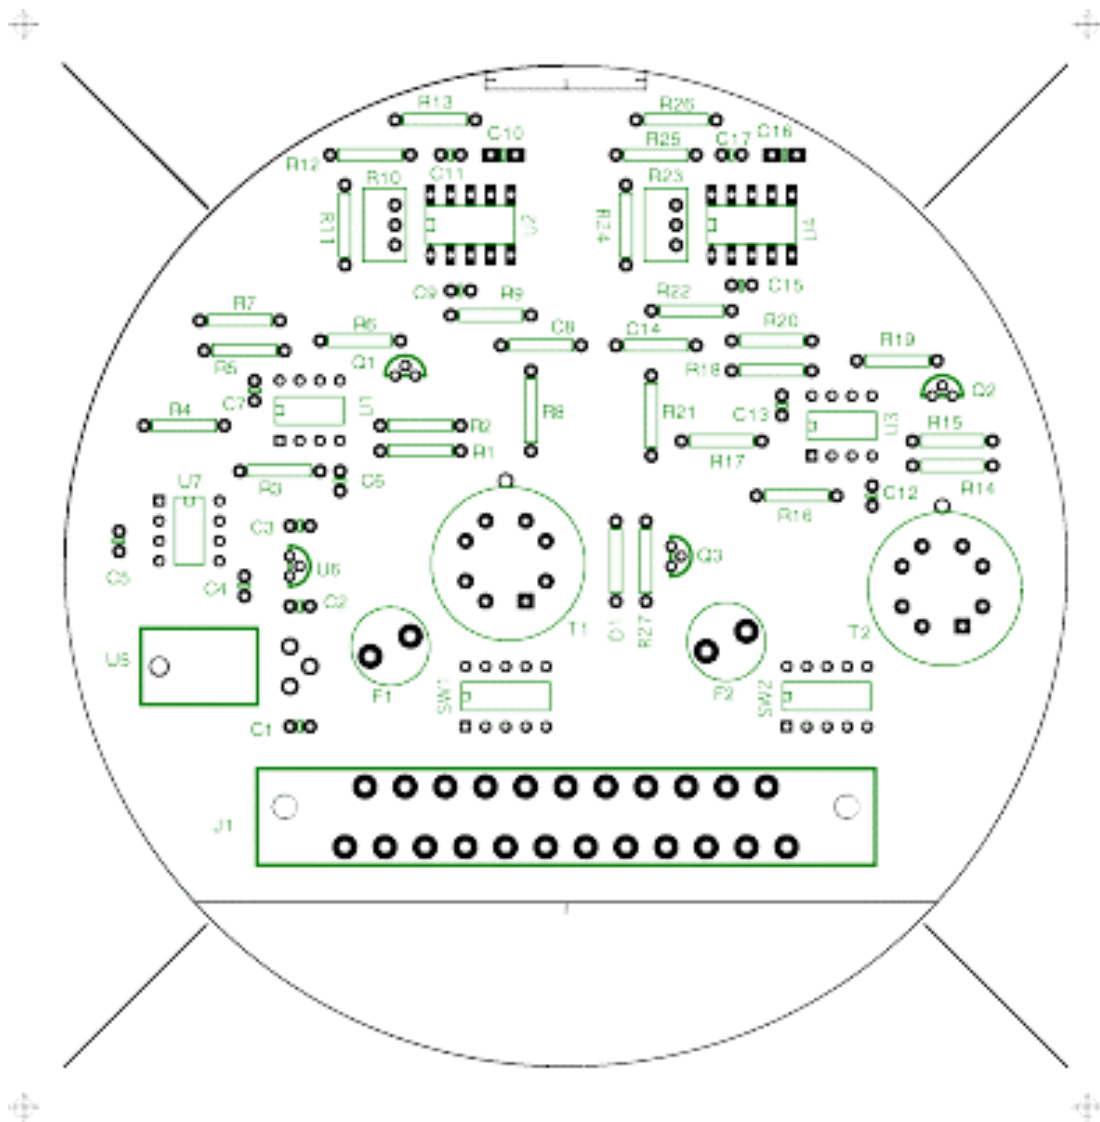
Layout of Instrument Interface printed circuit card showing component locations.
